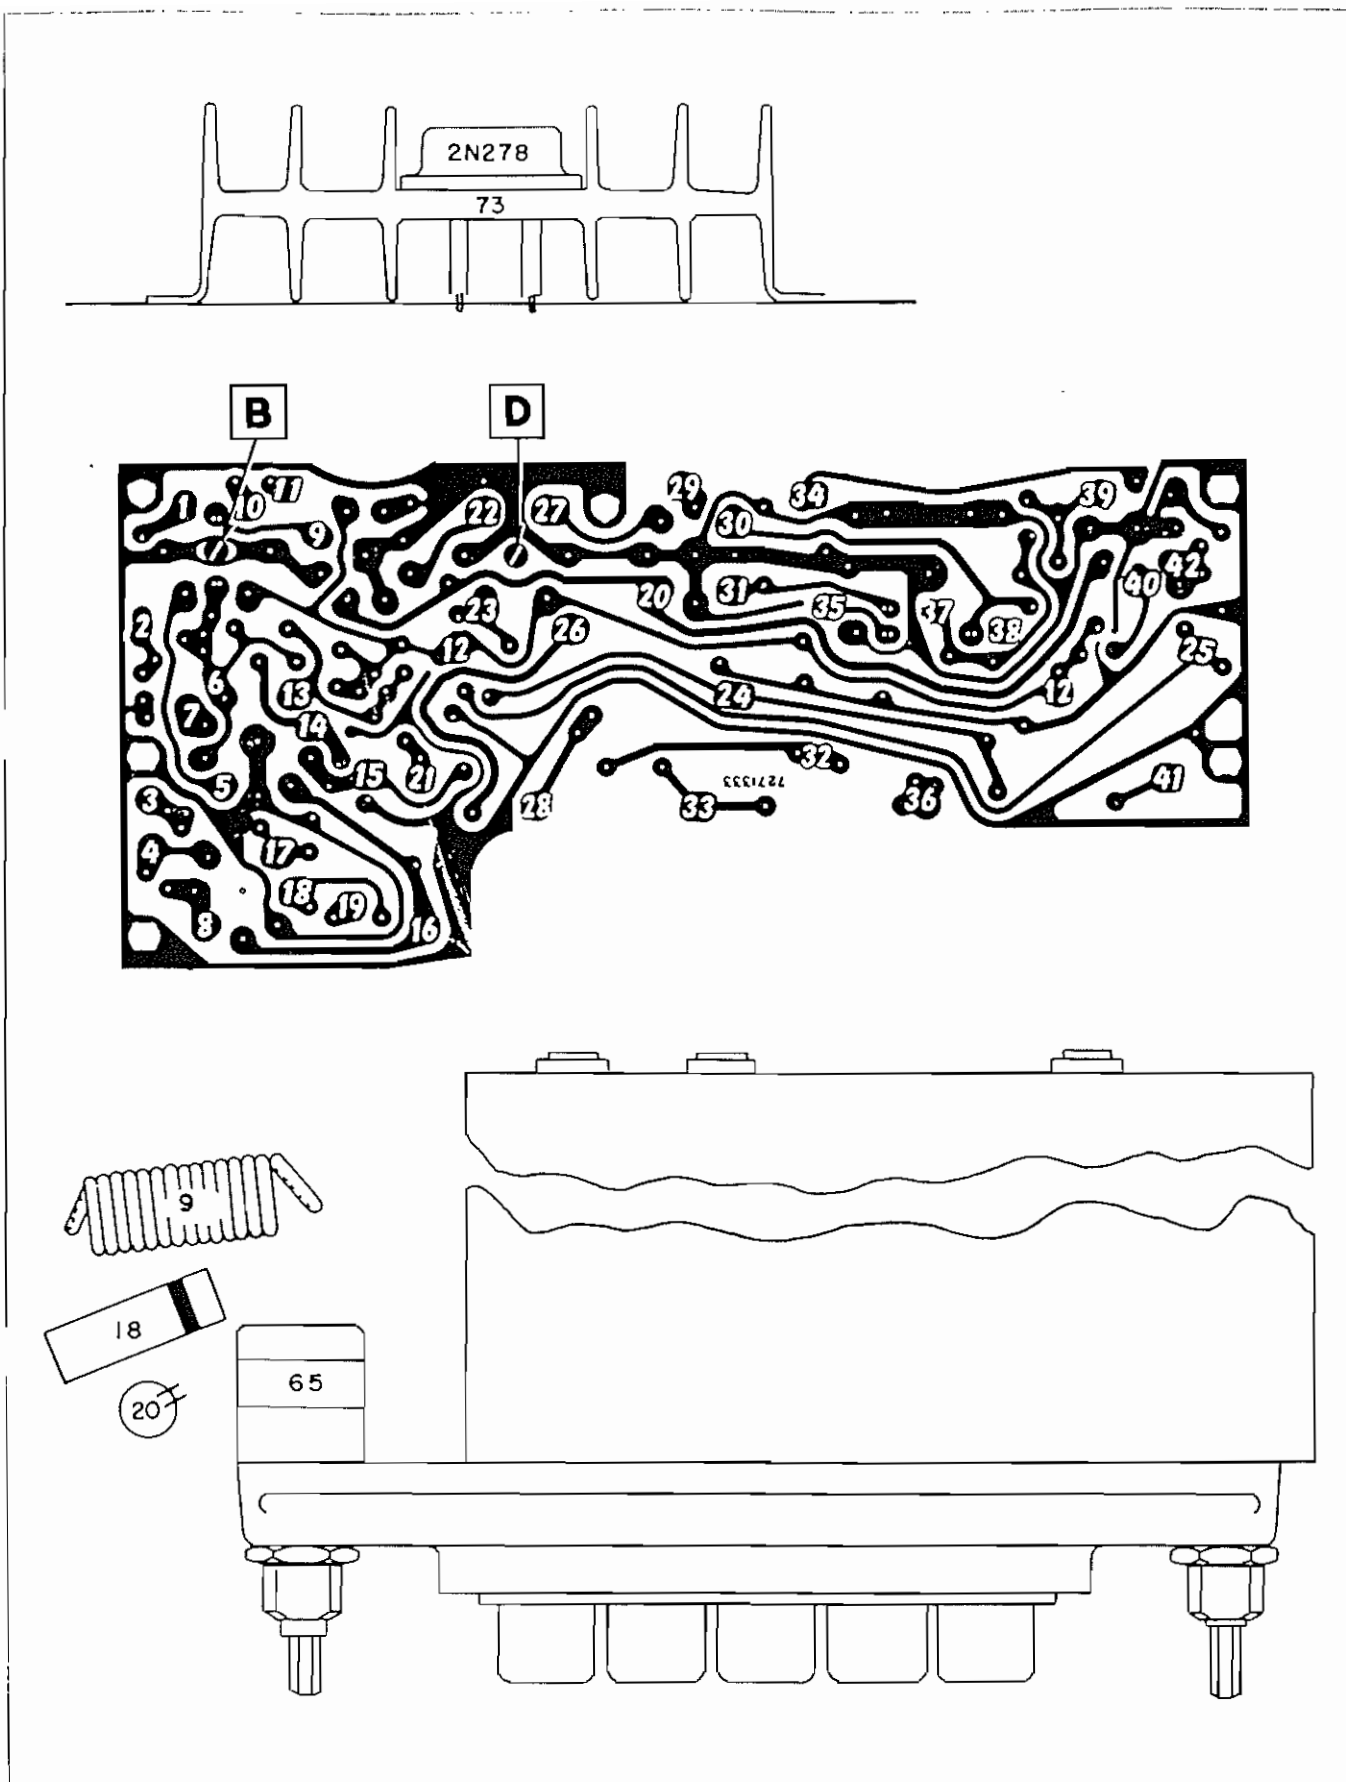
PARTS LAYOUT - BOTTOM VIEW - 987727 - RADIO
